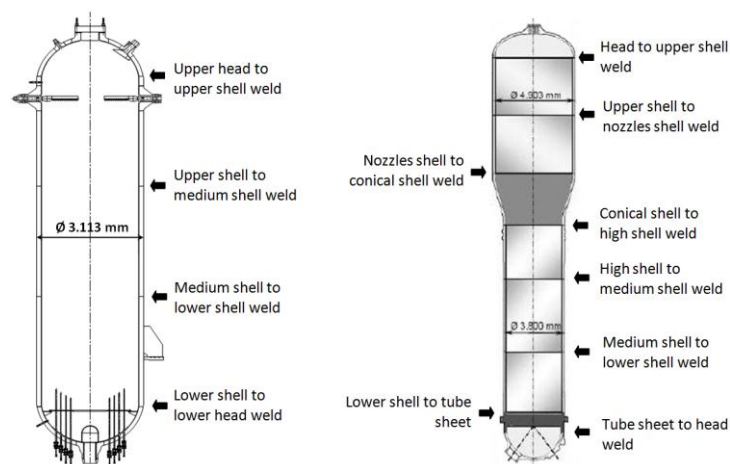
Pressurizer and Steam Generator weld outline
